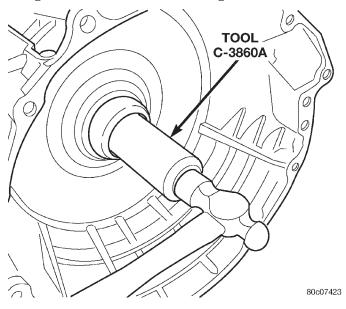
Install Oil Pump Front Seal ADAPTER HOUSING SEAL
